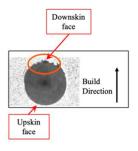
Photograph of a section through a cooling line fabricated by AM, showing a significantly rougher surface on the downskin side.
